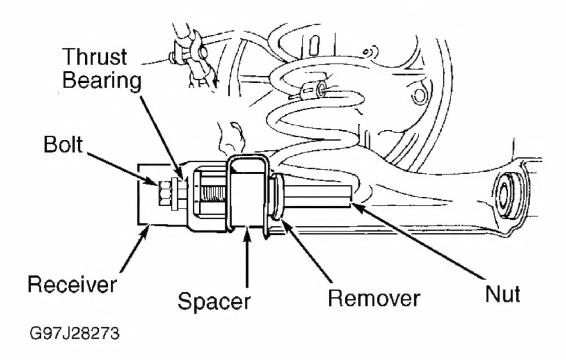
Removing Lower Control Arm Front Bushing (Typical) Courtesy of GENERAL MOTORS CORP.
